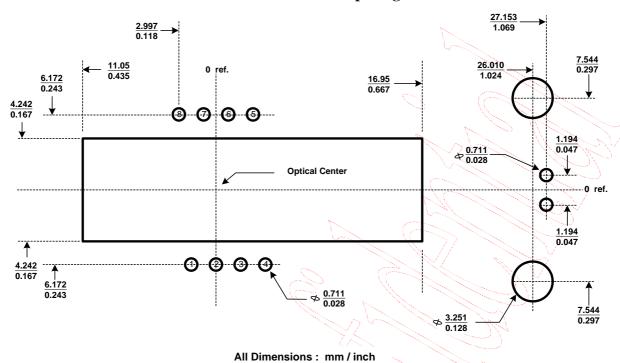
Recommended PCB Mechanical Cutouts and Spacing
